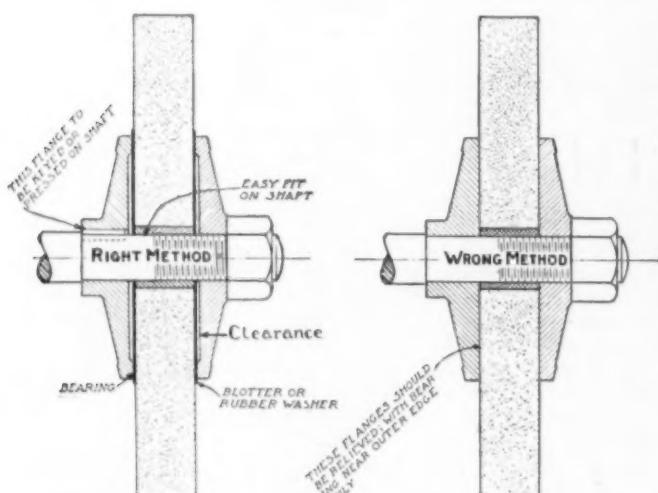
THE RIGHT AND THE WRONG WAY OF MOUNTING WHEELS.
